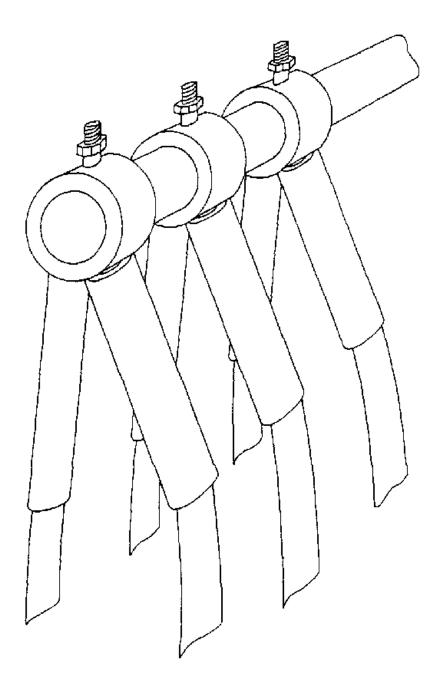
TWECO Roto-grounds Mounted on a Rotating Shaft.
